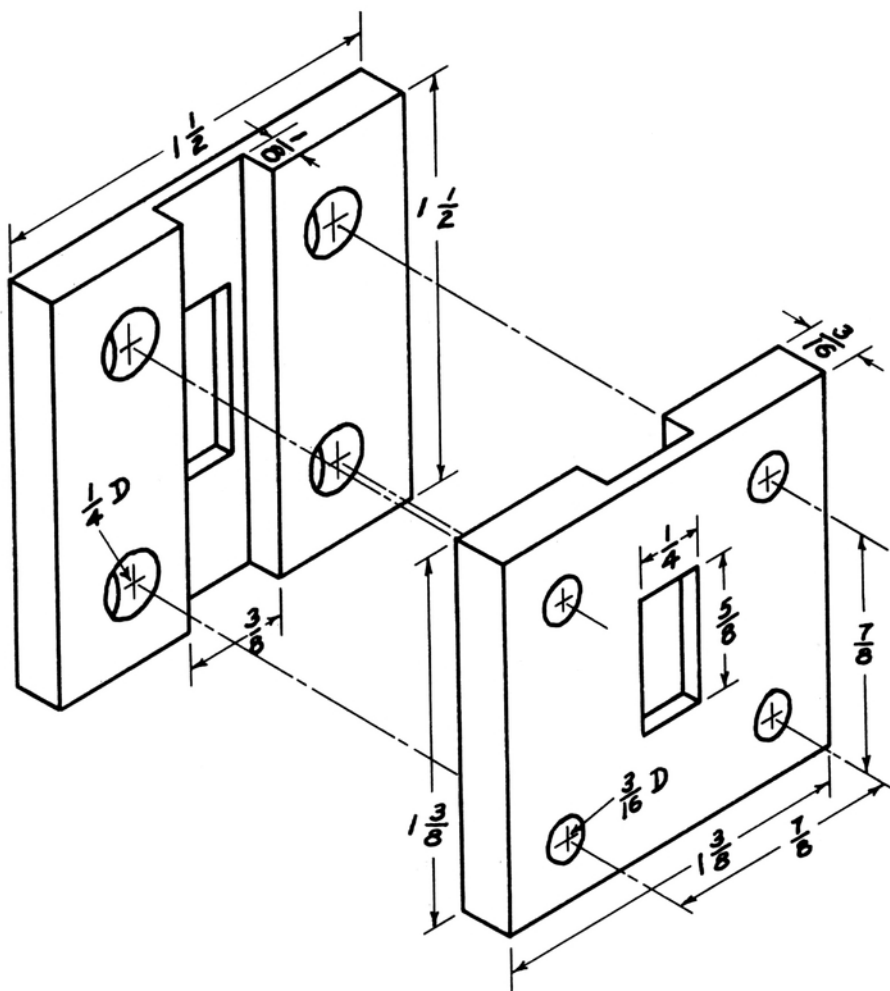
Demountable cell holder adapter for broken sodium chloride windows. Dimensions shown in inches; holes are appropriately centered.
